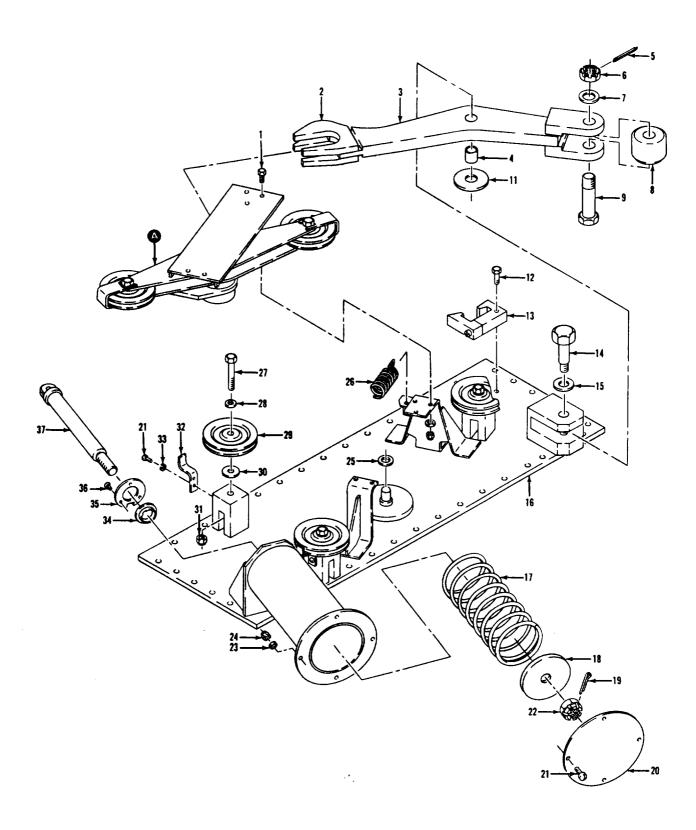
Centering Device Actuator Assembly (Sheet 1 of 3) $\,$
